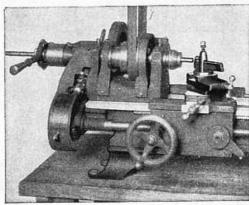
Boring a Conical Die on the 9-inch Junior Lathe
